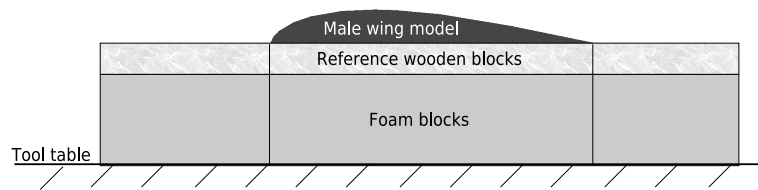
Section of the outer wing/reference block assembly; tip section.
